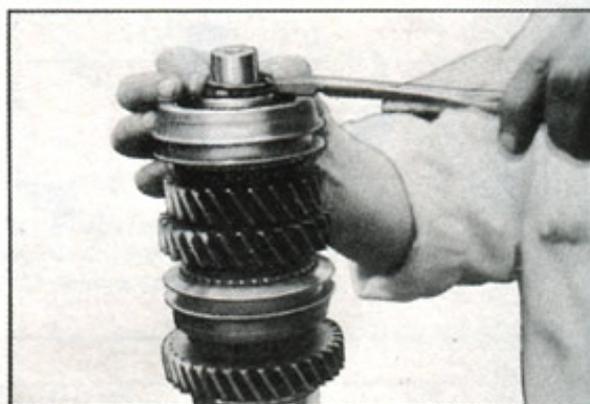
Removing 3-4 Clutch Assembly Retaining Ring
